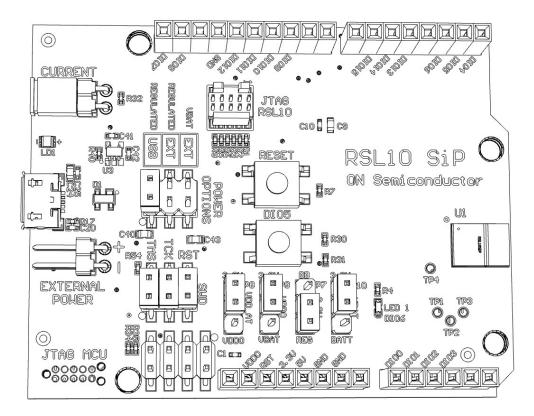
Three-Dimensional Line Drawing of the Board (Top View)
